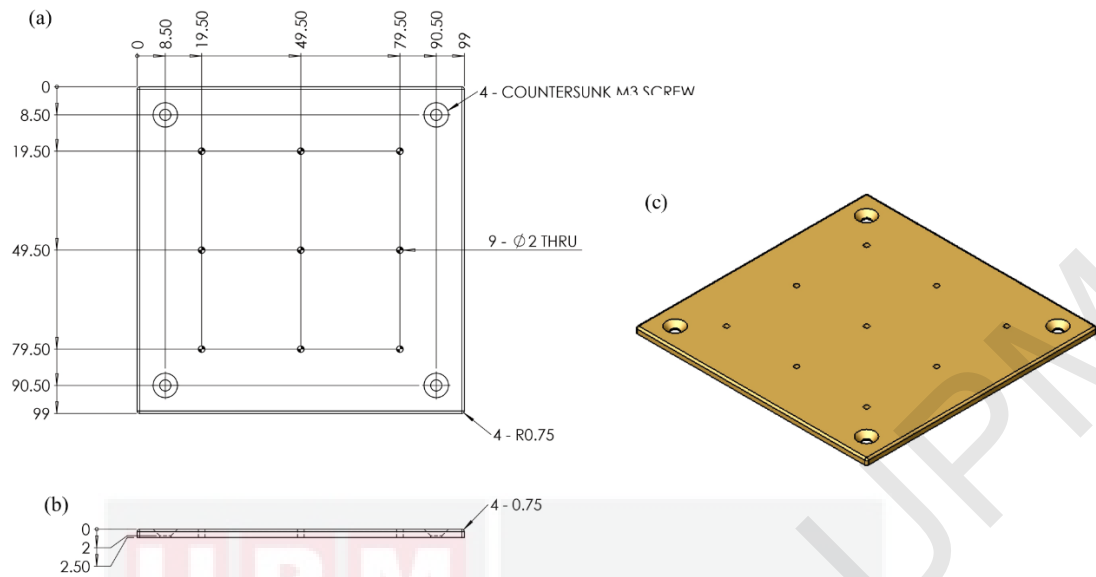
Case cover design for the fifth iteration (MB1): (a) Bottom view, (b) side view and (c) orthographic view
